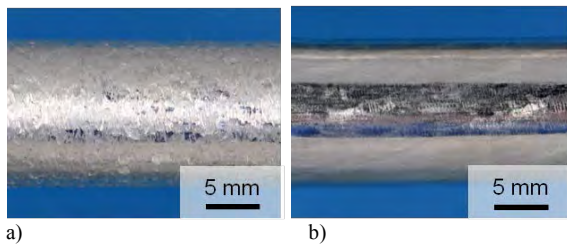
Work piece surface after dry forming of aluminum ( $v_f = 500$  mm/min); a) with smooth tools, b) with structured tools.
